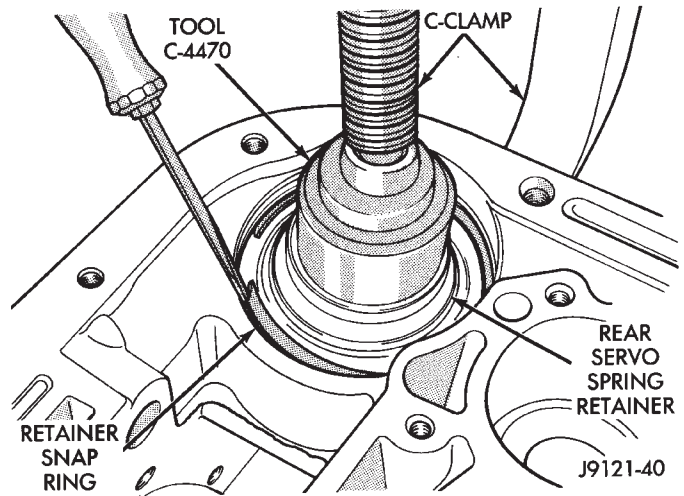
Installing Rear Servo Snap Ring—46RH overdrive piston retainer. Center hole in gasket is smaller than retainer and cannot be installed over retainer.
